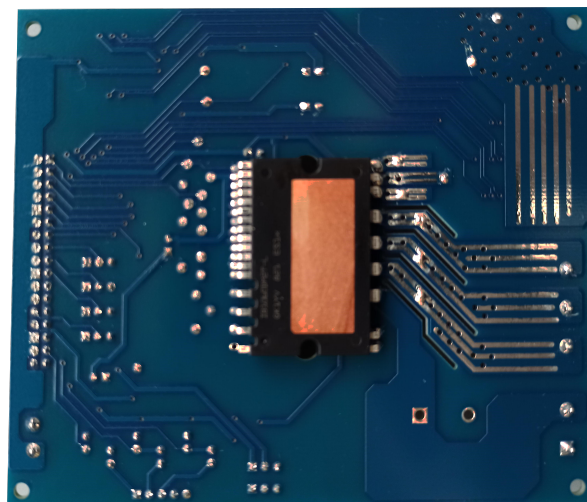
SLIMM 2nd serie motor control internal demo board (bottom view)
